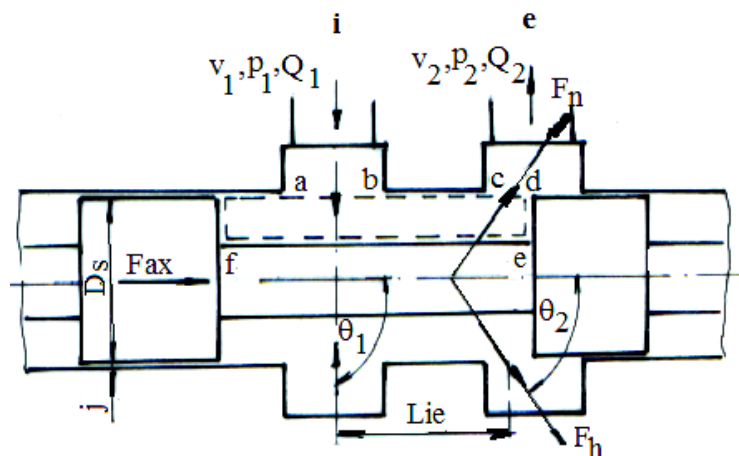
Highlighting hydrodynamic forces in the spool - valve assembly
